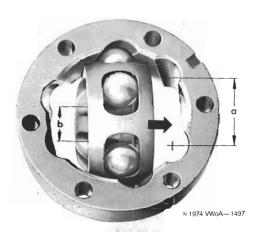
Ball and hub assembly positioned in the outer ring. Arrow indicates the direction in which the ball and hub assembly must be turned to complete the installation.
